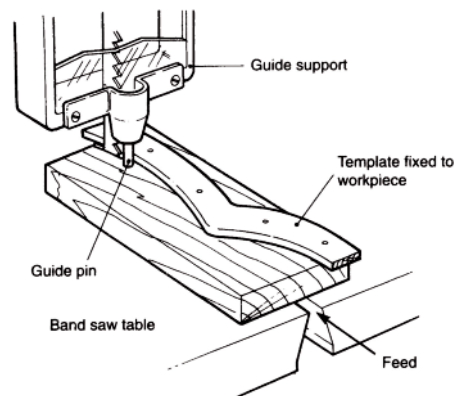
Cutting irregular shapes on a narrow band sawing machine using a template and guide
